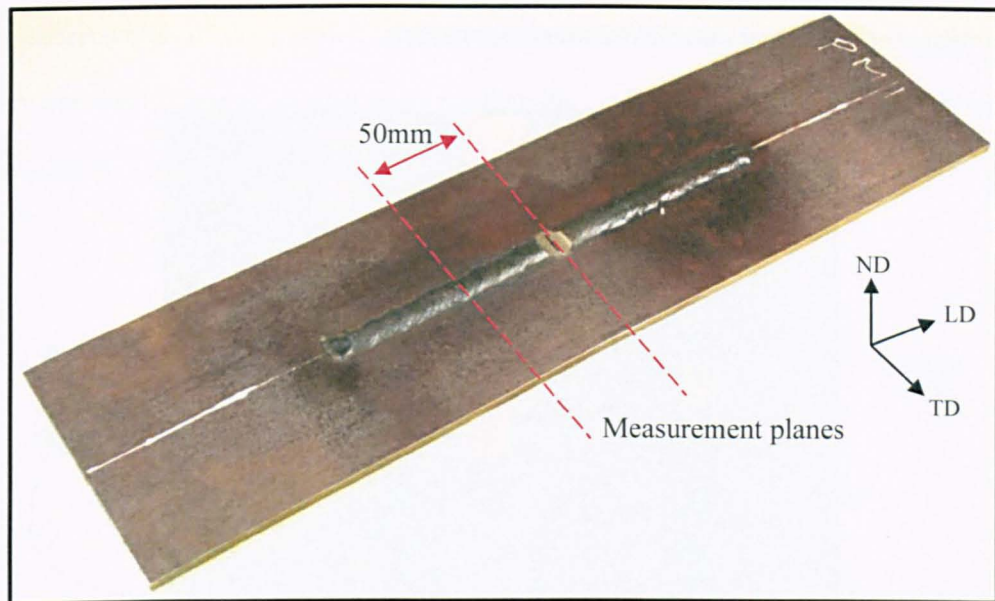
CCT specimen incorporating a 300mm weld bead on the plate surface, measurement planes also shown.
